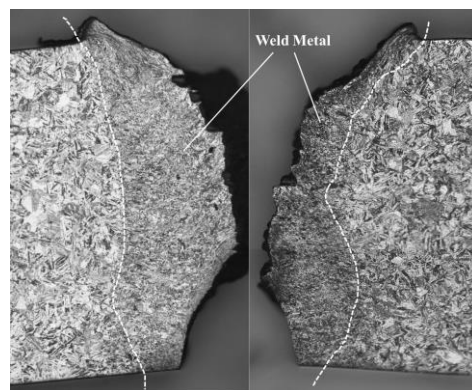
Cross sectional view of fracture specimen after Charpy impact test
